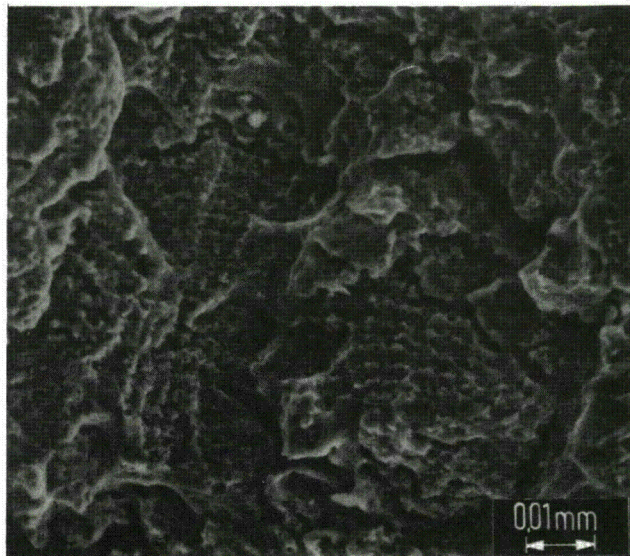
Examples for fracture surfaces in the "brittle" fatigue crack growth region (fd = 19,5 - 24,0 mm)
